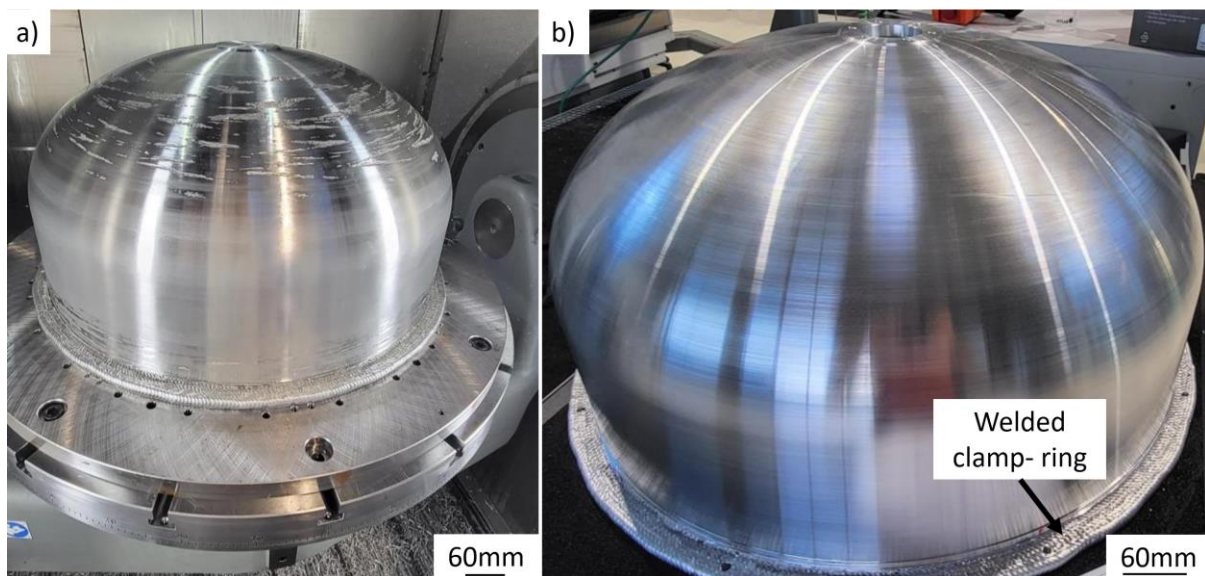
Machining process of the outside of an inner tank shell. The shell is screwed onto the machine table using a waDED manufactured clamp ring around the tank. a) Early machining stage with multiple unmachined sections on the surface. b) Tank shell with final outer dimension and completely machined surface finish.
